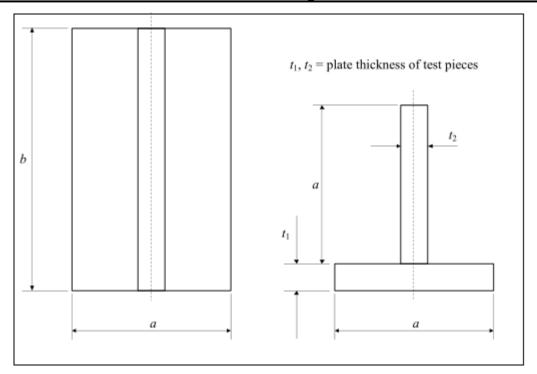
Test Assembly for Fillet Weld
